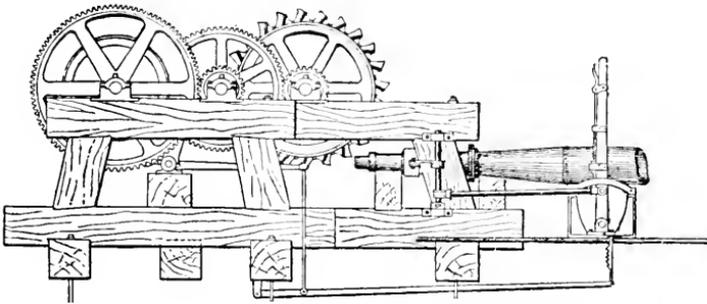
SINGLE DRUM GEARED HOIST WITH PELTON WHEEL. Elevation.
